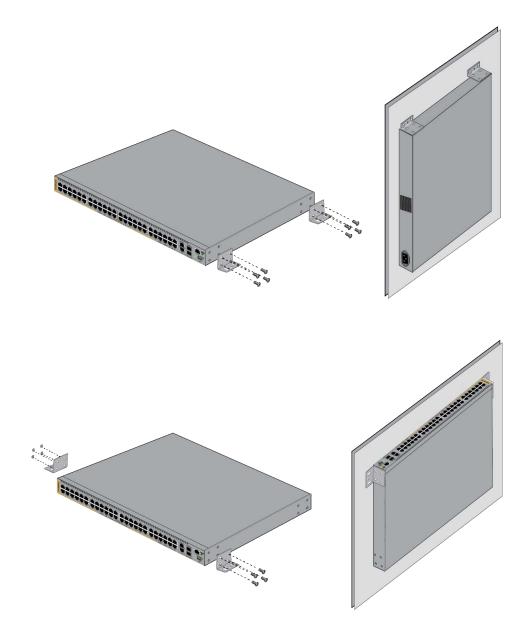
Attaching the Wall/Equipment Rack Brackets to the x330-52GTX Switch (continued)
